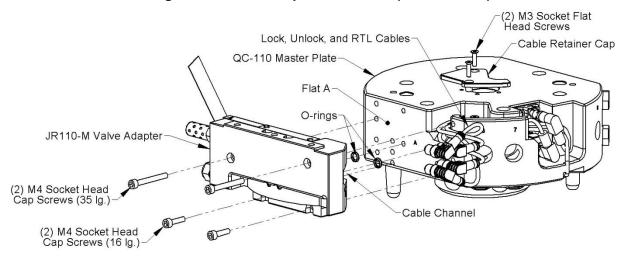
Valve Adapter Installation (JR110 Shown)
